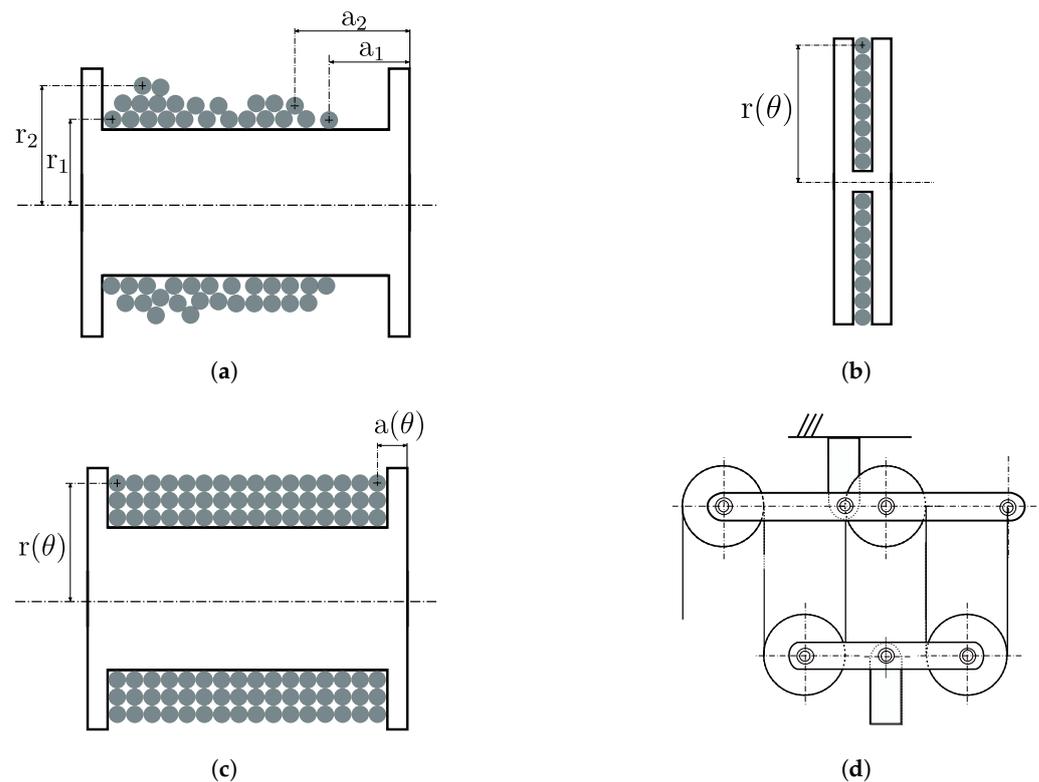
Examples of cable actuation units. (a) Smooth drum. (b) Short drum with overlapping cable. (c) Drum where the cable is overlapped with a self-reversing screw. (d) Hoist.
